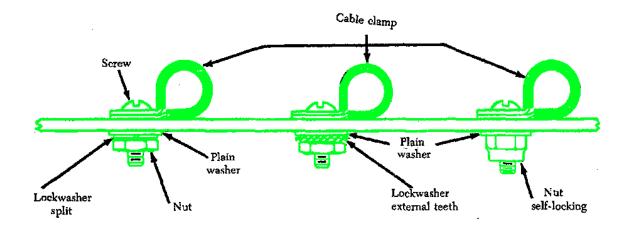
shows some typical mounting hardware used in installing cable clamps.
